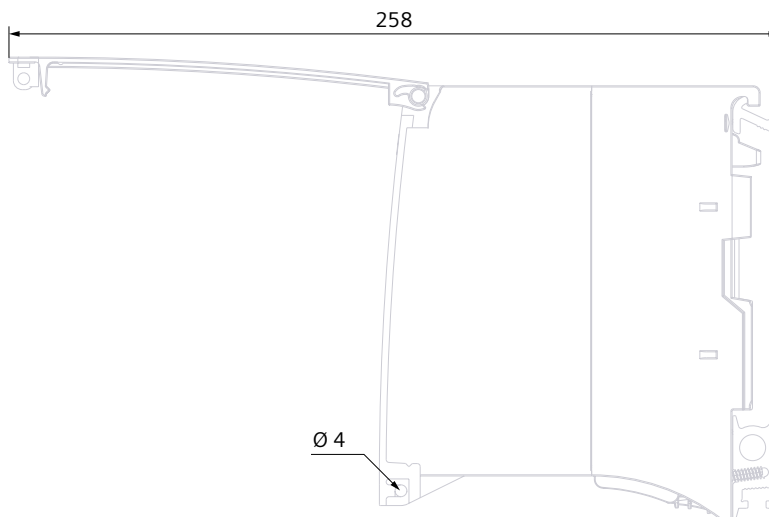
Dimension drawing CPU 1518-4 PN/DP MFP, side view with open front panel
